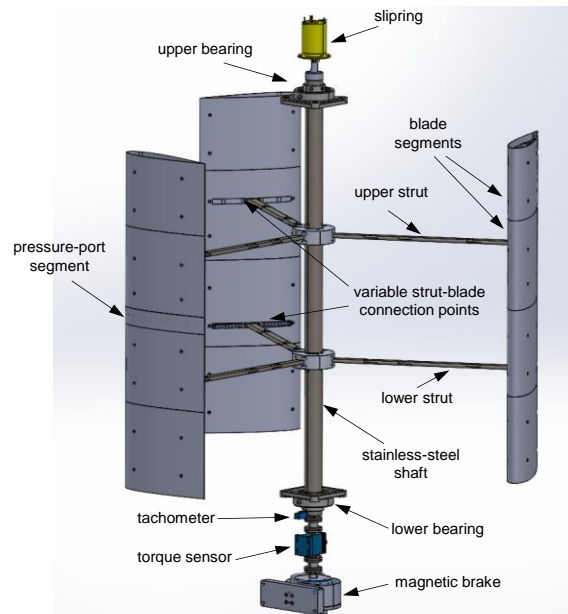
Schematic rendering of the 3-bladed turbine model configuration, with the test-section removed, showing the main components.
